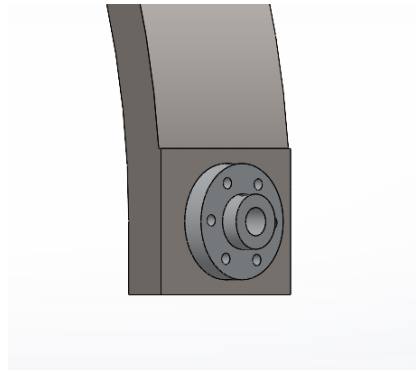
Connection between the Universal Aluminum Mounting Hub and the beam
